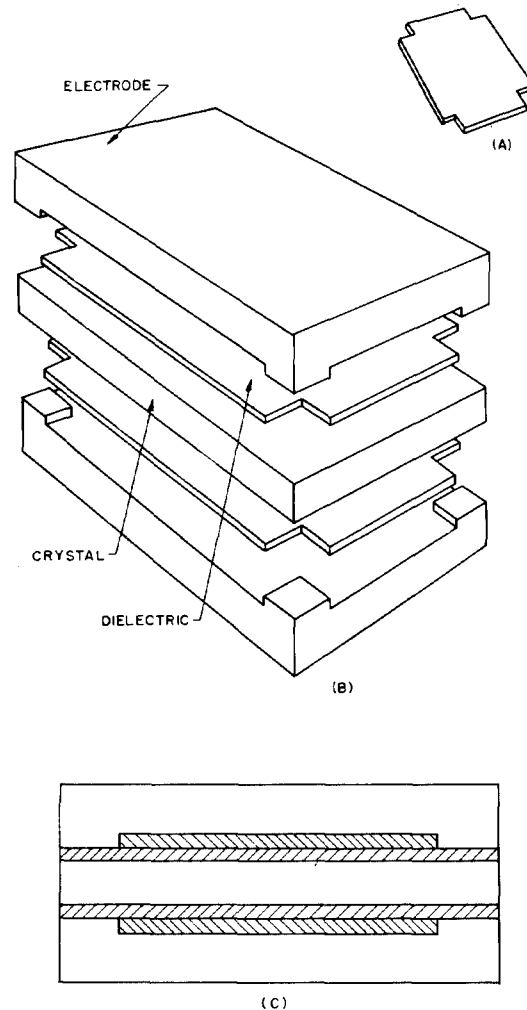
Two methods (B and C) by which a corner-clamped, air-gap holder can be converted into a dielectric sandwich. Figure A shows a dielectric sheet cut to the dimensions of the air gap
